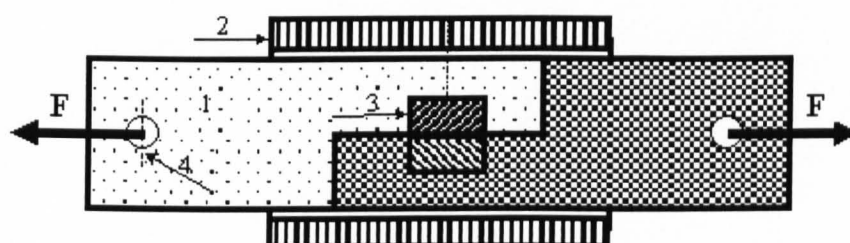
The shear testing fixture: 1) holder; 2) steel tube; 3) specimen; 4) bolt.
